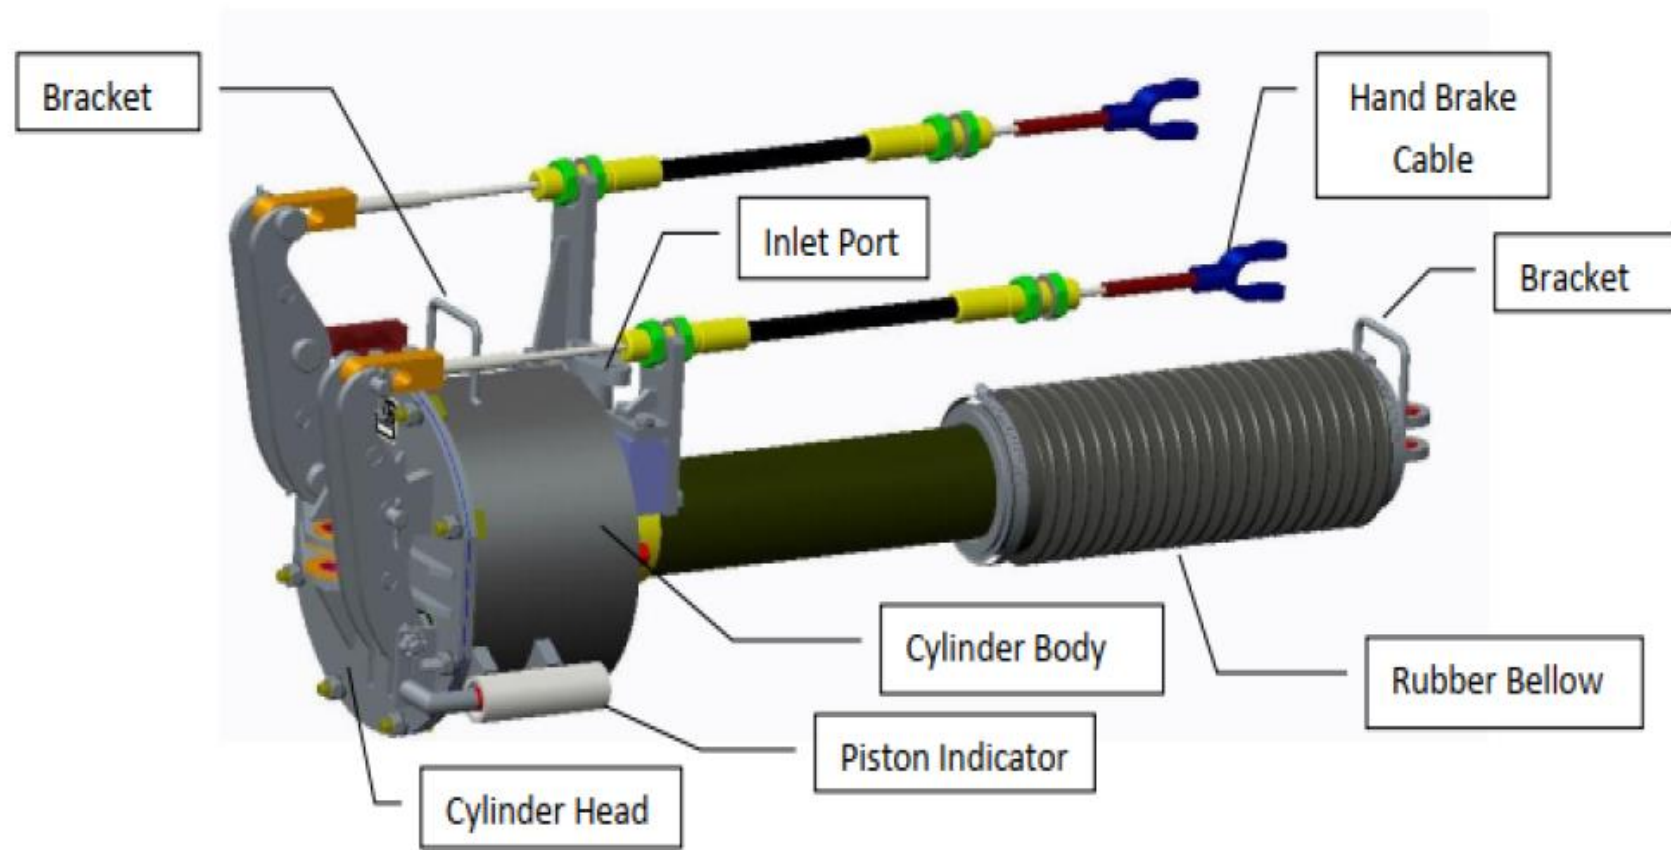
Brake Cylinder – 11 Inch with hand brake arrangement (Drg. No.3EB7348 Alt. Latest)
